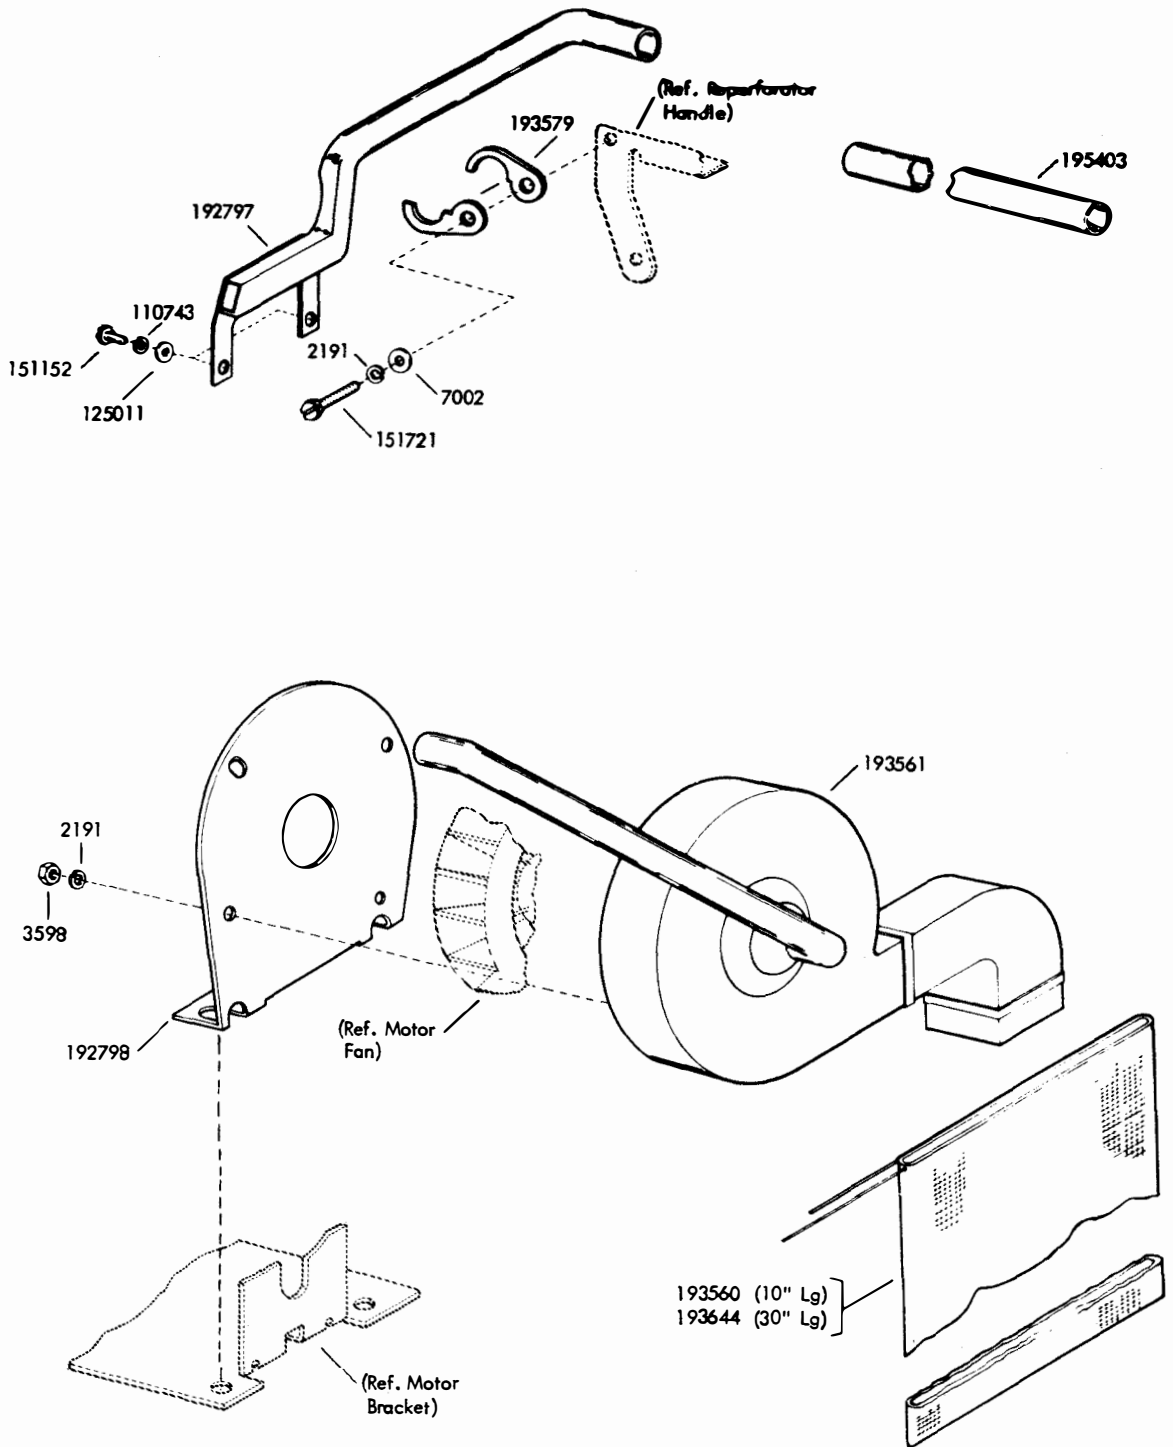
Modification Kit 192999 to Provide Vacuum Chad Removal for Send-Receive Typing Reperforator Set
